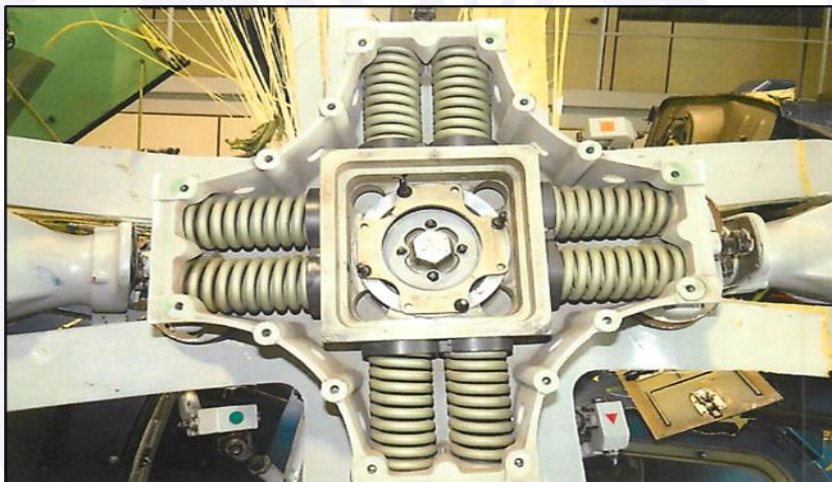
View of the vibration damping system in the main rotor star, without failure in the springs.
